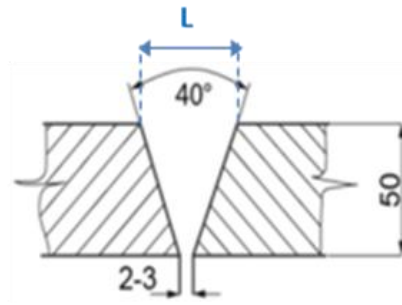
Weld Geometry taken from Fricke, W. and Paetold, H. (2012)
